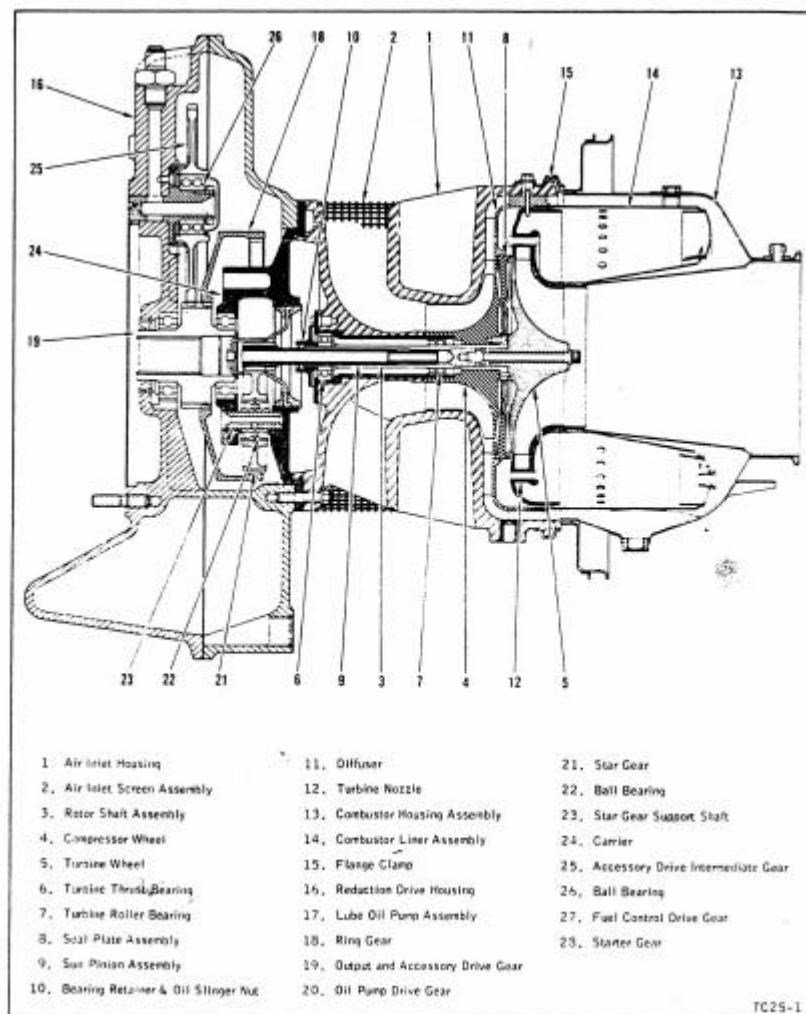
Cross Section View of Gas Turbine Engine (Sheet 1)
